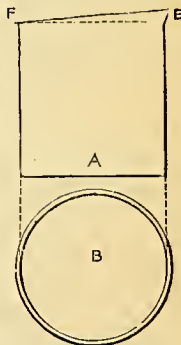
BENDING EDGE OF TIN OUTWARDS. A, Elevation. B, Plan.
